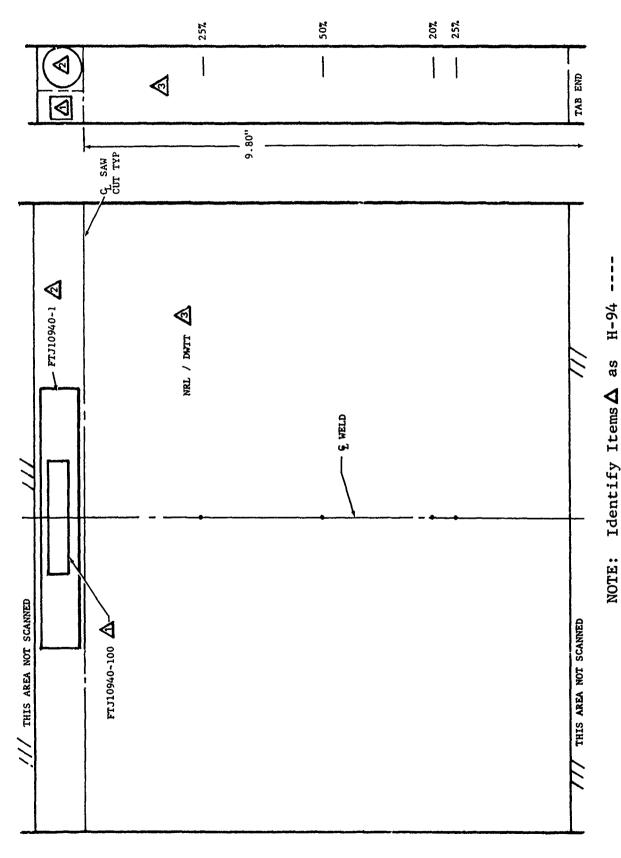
MATERIAL ALLOCATED FOR H95 PLATE ELECTRON BEAM WELD
